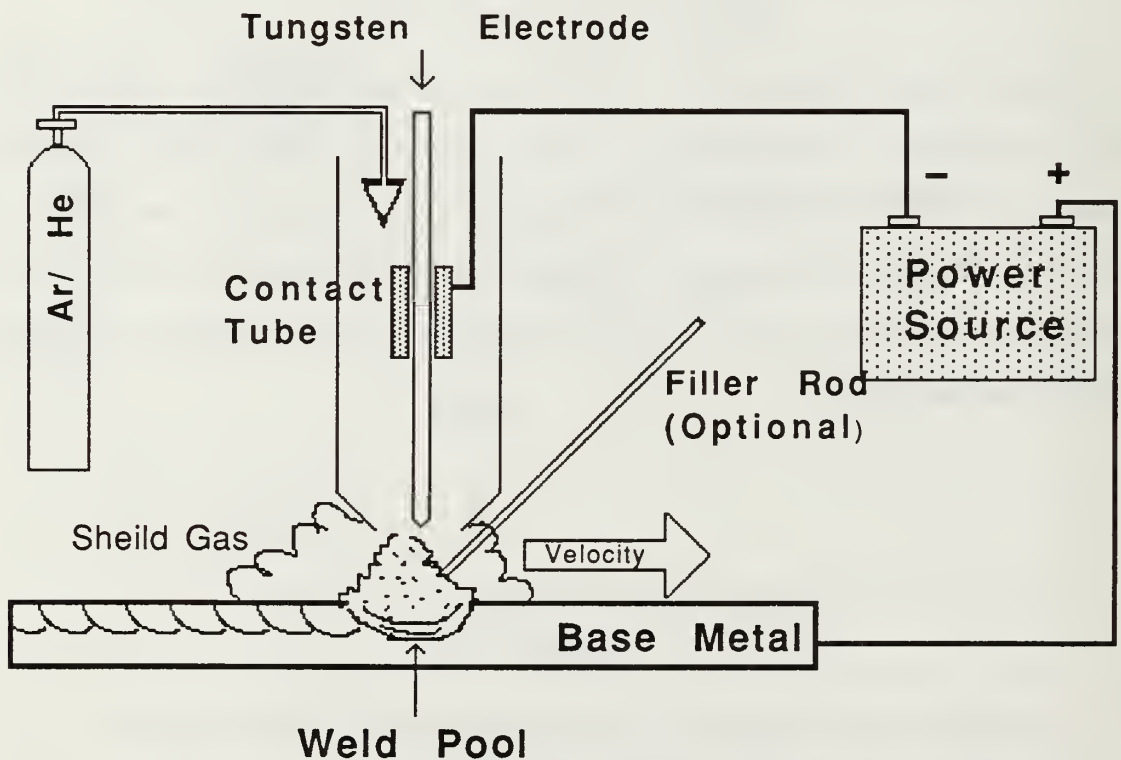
Tungsten Inert Gas (TIG) Welding Process
